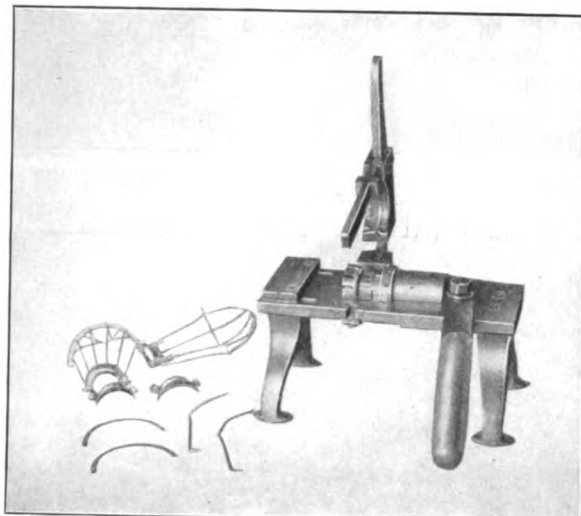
ANOTHER VIEW OF CLINCHING MACHINE
